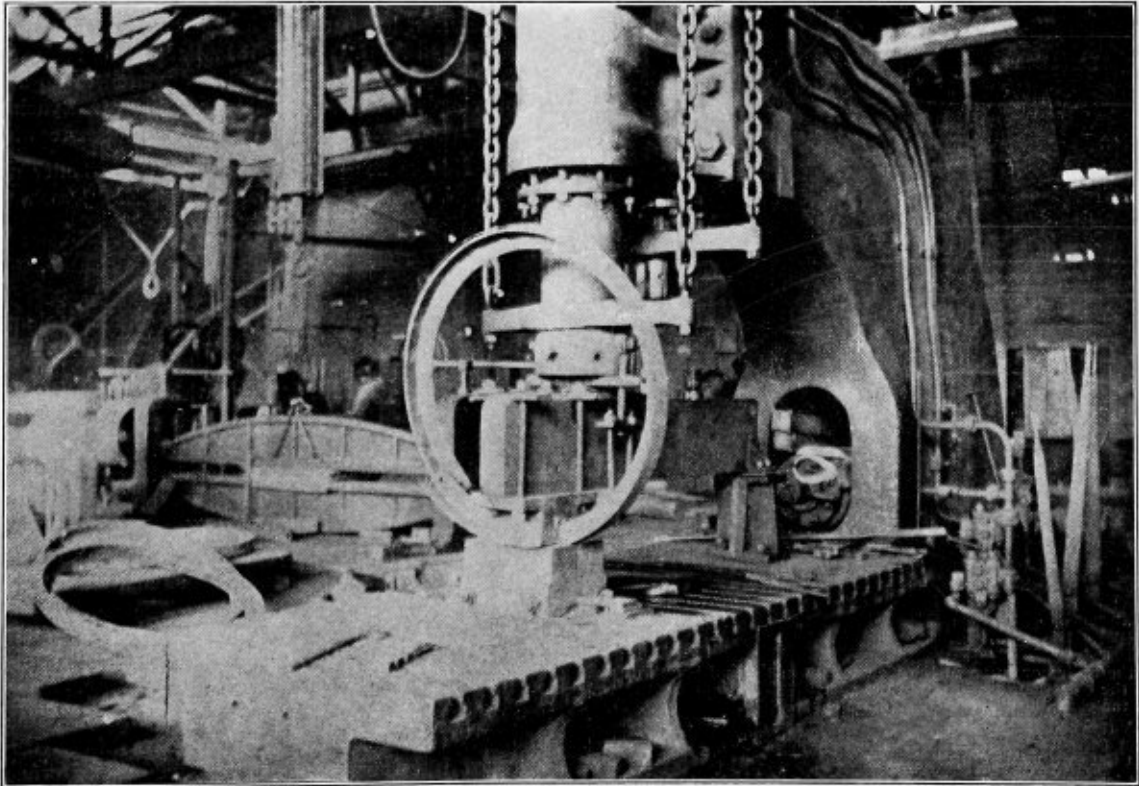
SWAY BEAM METHOD OF BENDING ANGLE RINGS ON A SECTIONAL FLANGER.
